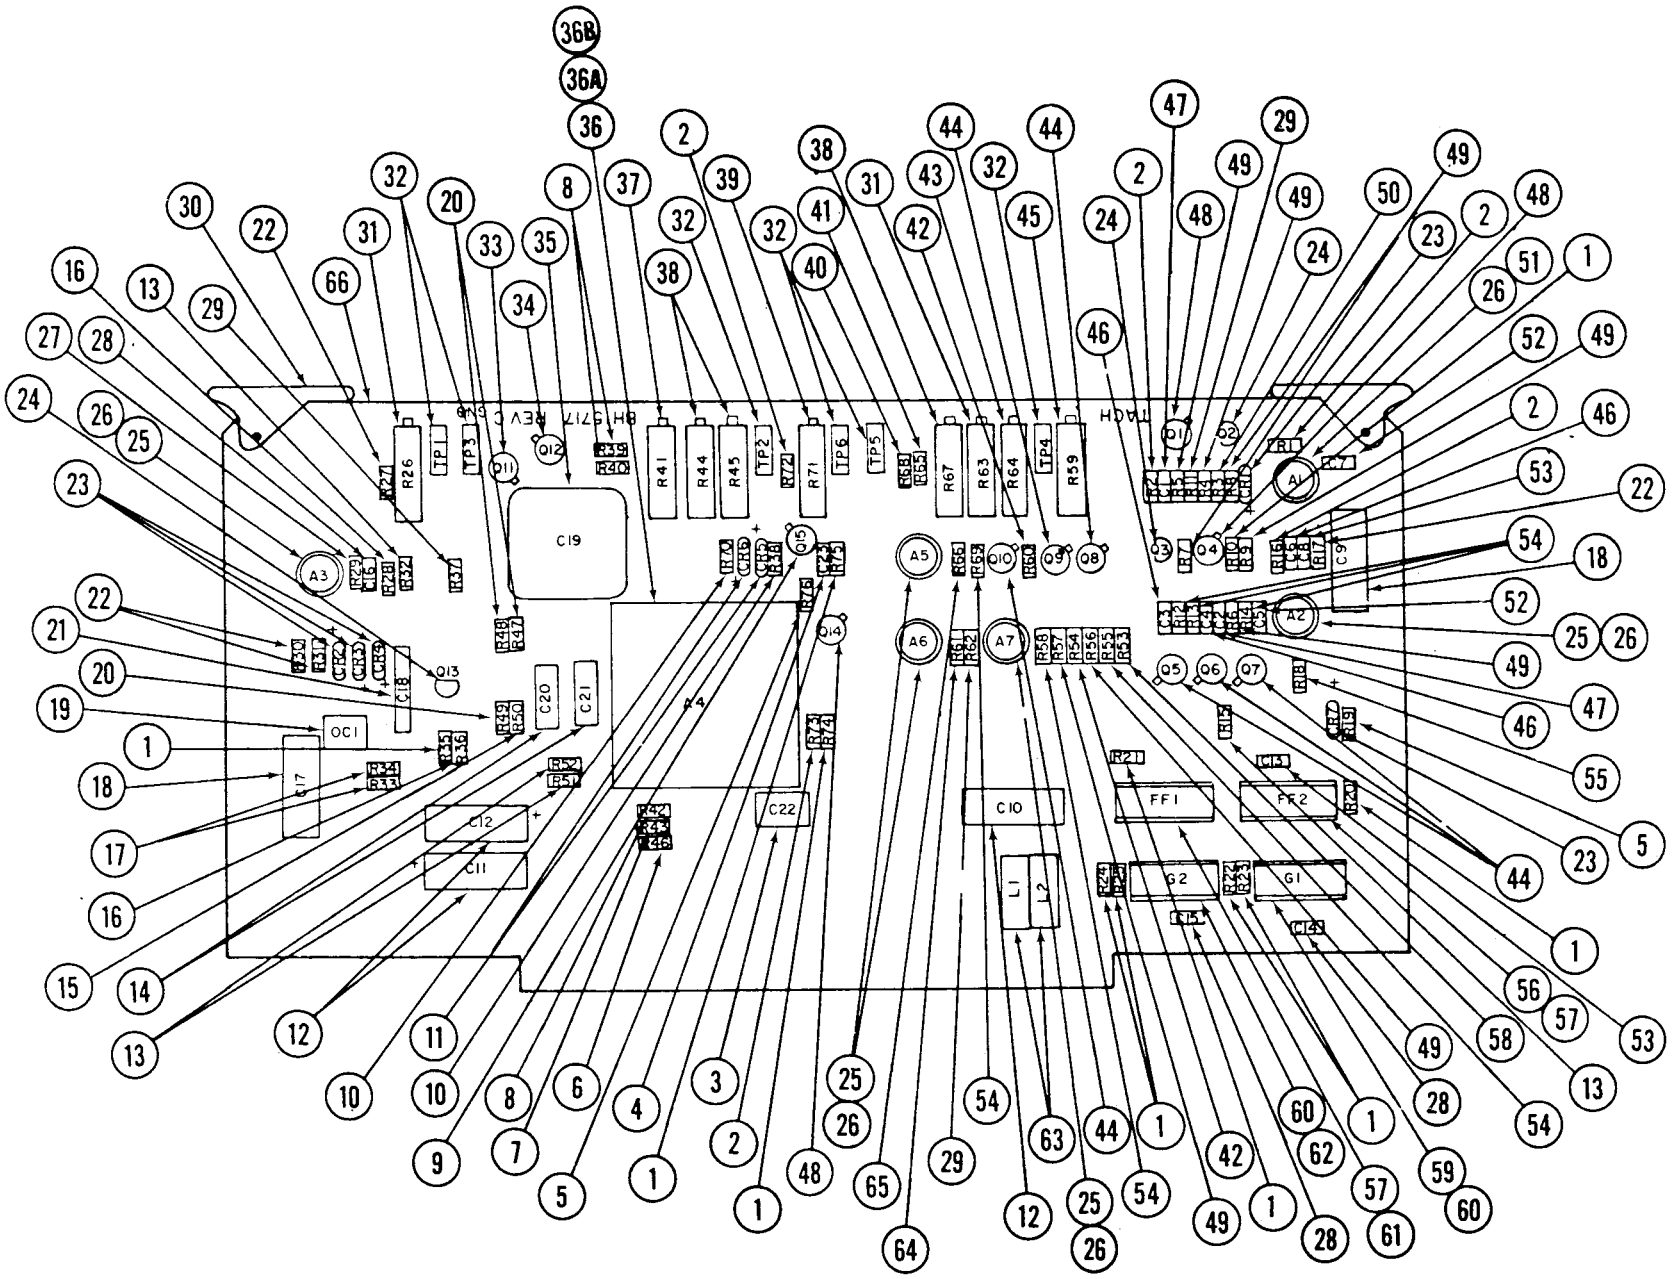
BH15717-1 Tachometer Circuit Board Assembly
